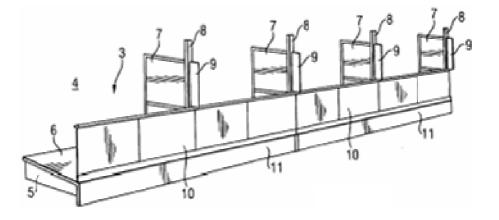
typical prefabricated balcony unit (European Patent Specification EP 1 101 693 B1). The individual components within the balcony assembly are identified as follows: 4 = ship hull; 5 = girder; 6 = deck / sandwich panel; 7 = dividing wall / door; 8 = pillar; 10 = railing / hand rail.
